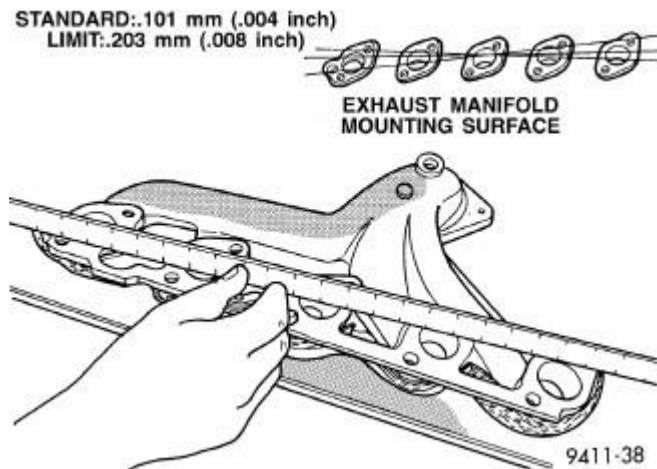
Exhaust Manifold Mounting Surface Checking-Typical
